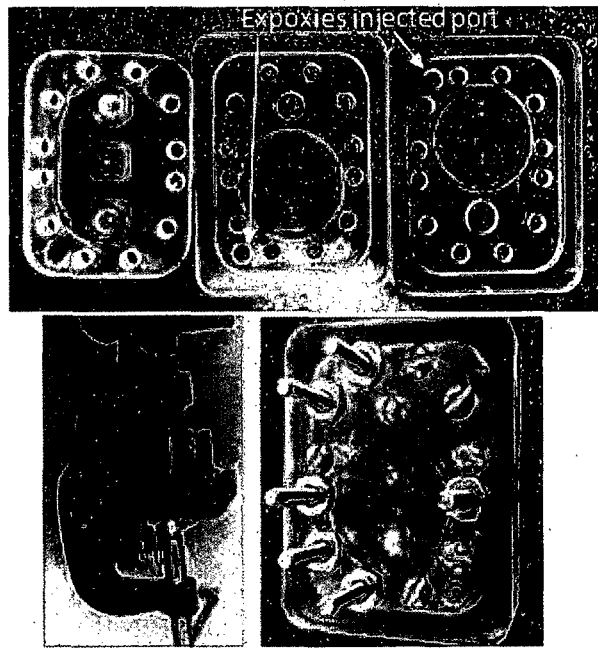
Injection of epoxy into the cavity for bonding and sealing. Assembly is screwed together and clamped at the center to ensure no epoxy flow into the valve surface.
